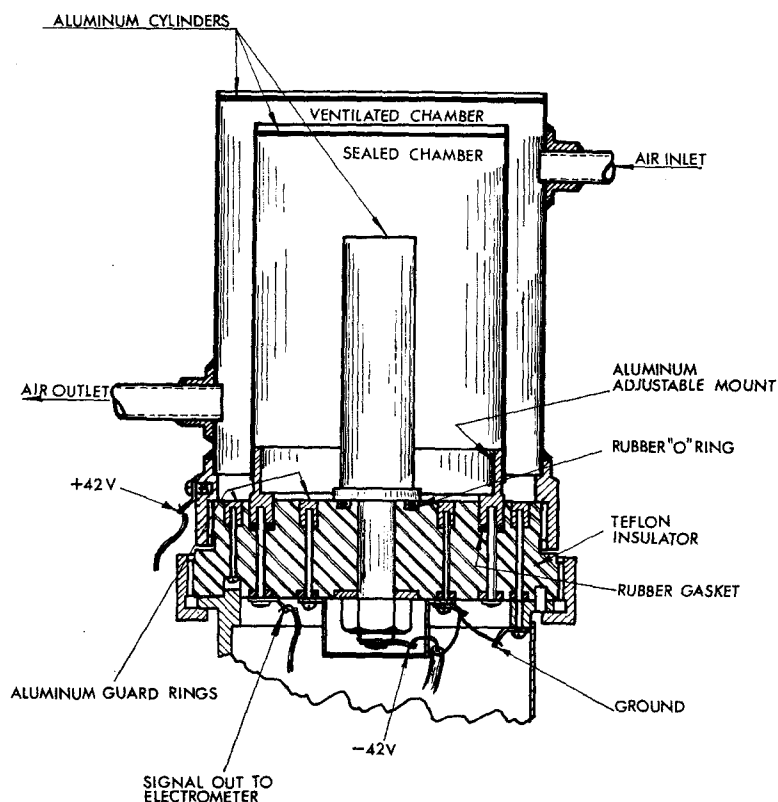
Details of 1200 or 300 cc ionization chamber assembly.
